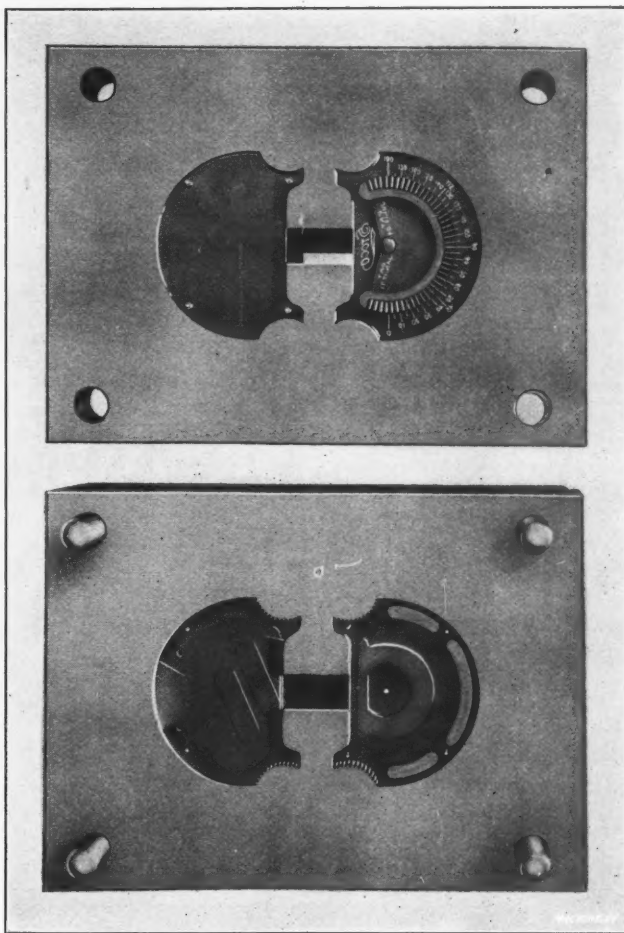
Die-casting Mold-halves for "Stoco" Inclinometer
